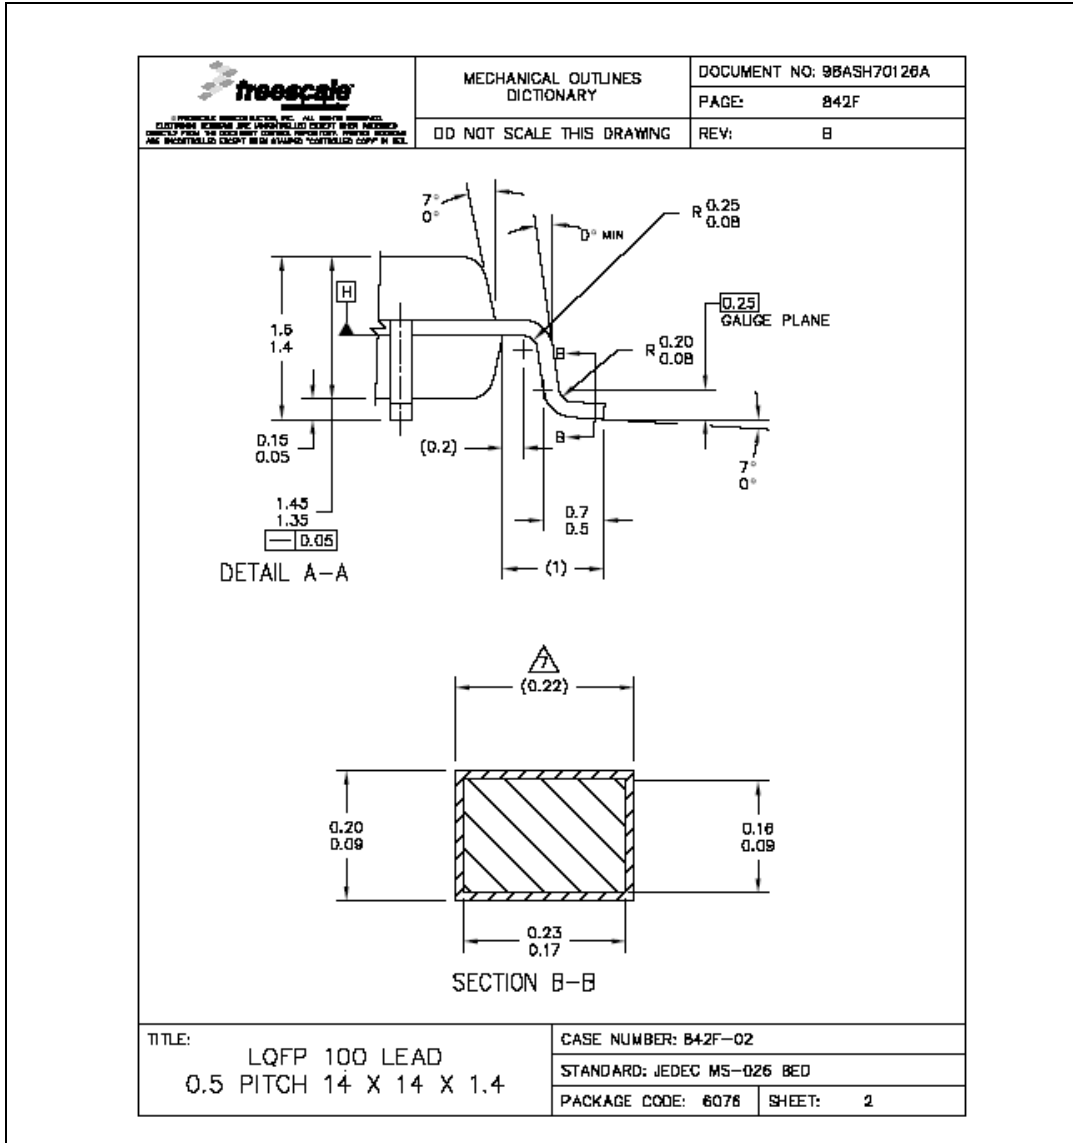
100 LQFP Package Mechanical Drawing (part 1)
